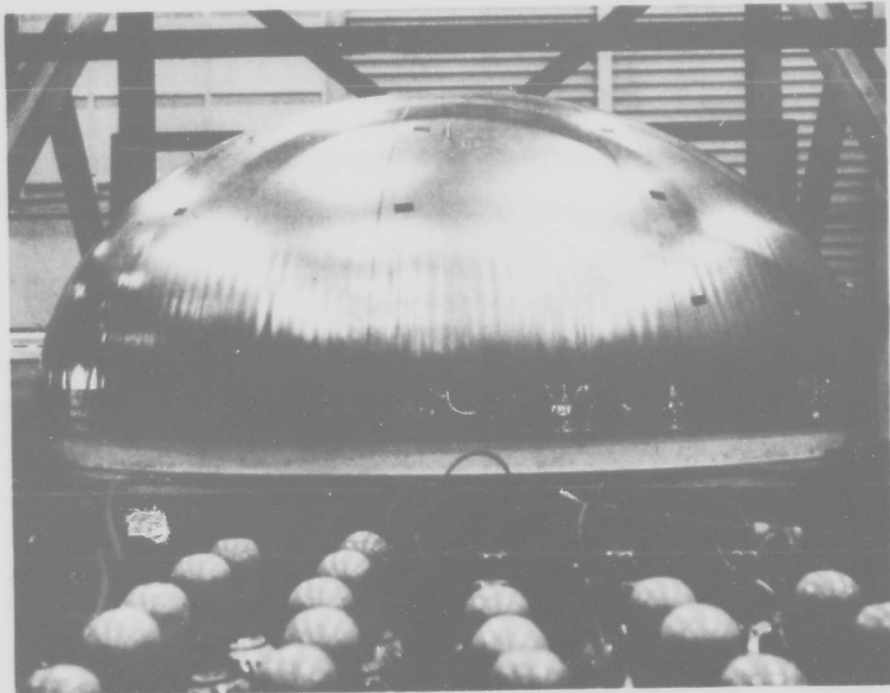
Compressive wrinkling in the frontal bulkhead.
